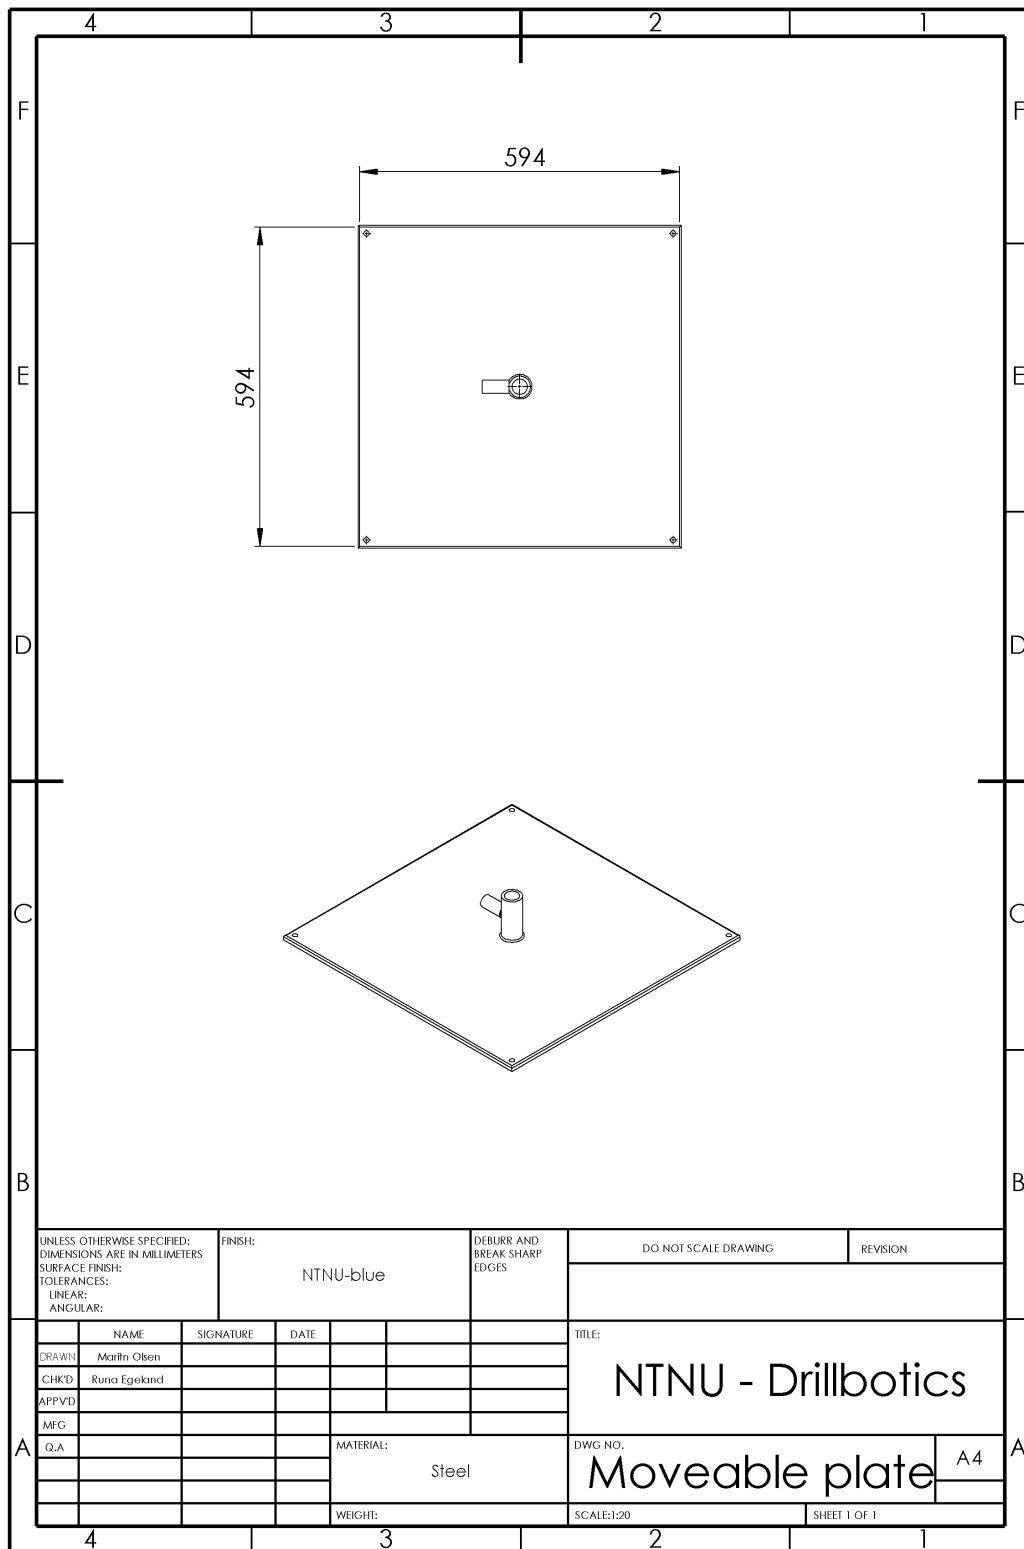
Moveable plate with riser. All dimensions in mm.
